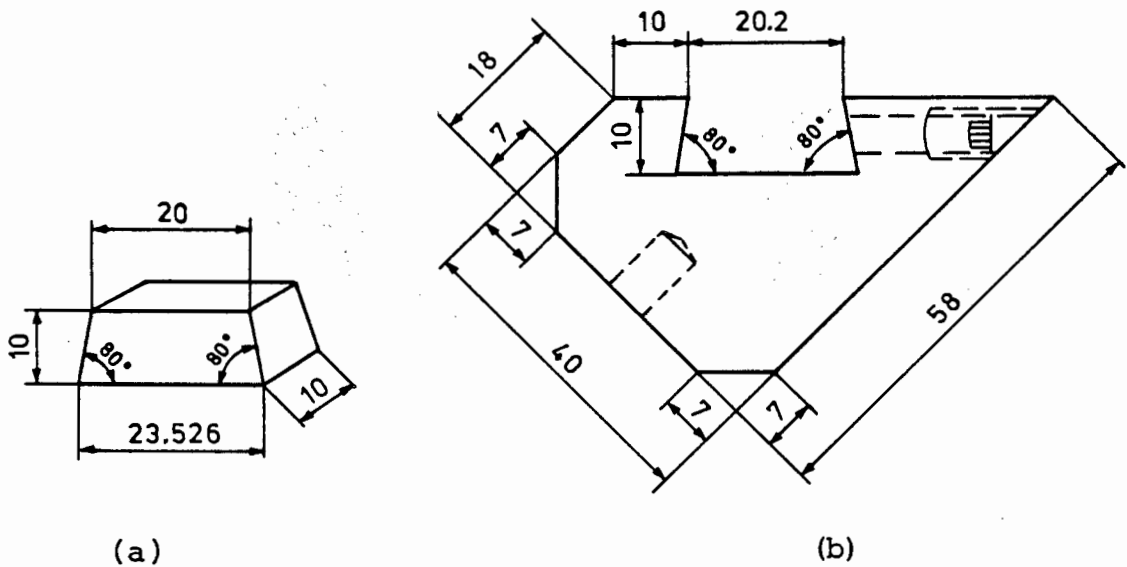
and 3.11b Trapezoidal test specimen (a) and specimen holder (b) showing dimensions in mm.
